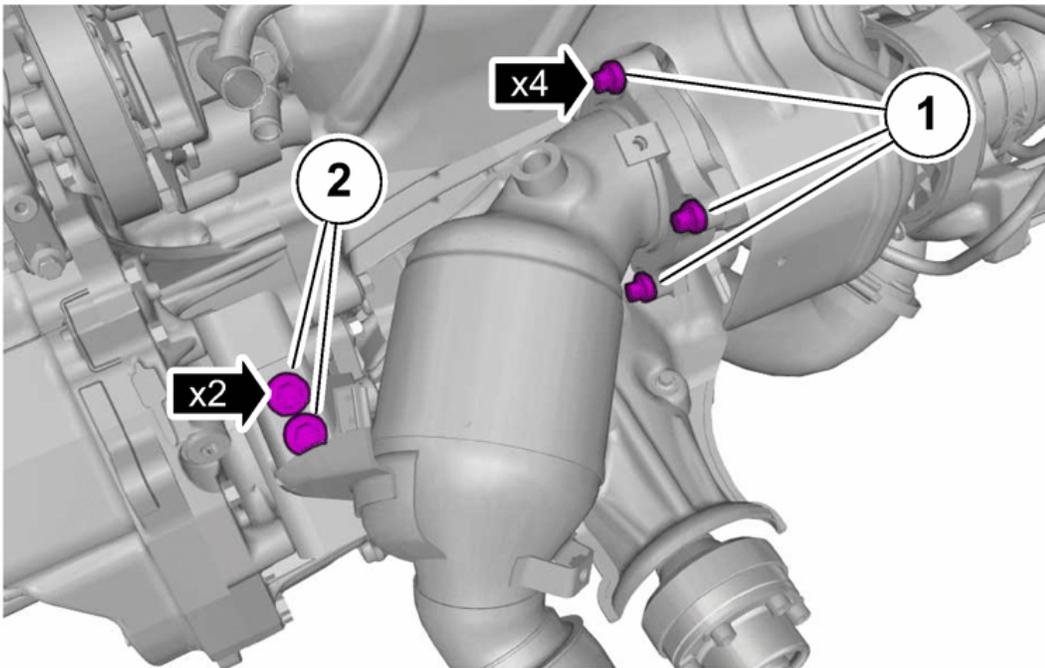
Catalytic Converter To Turbocharger Assembly Bolts
